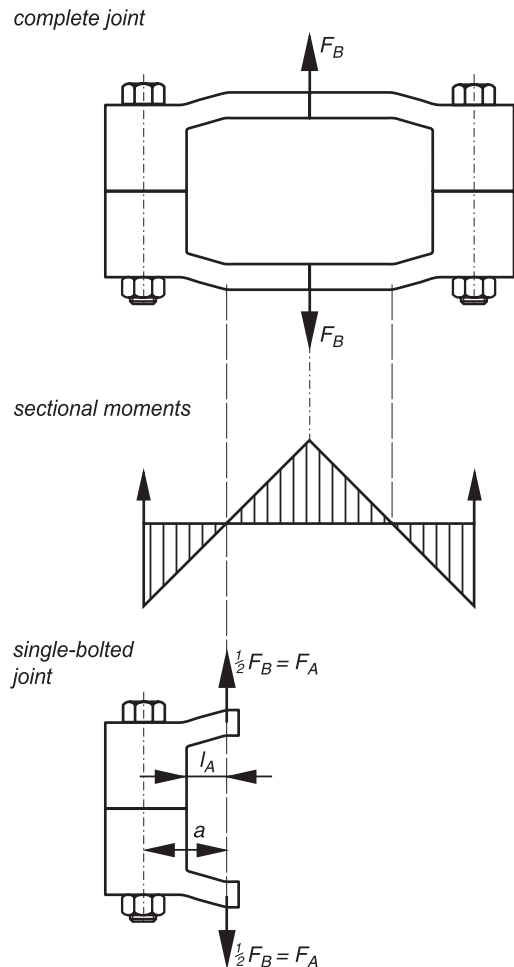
/6. Releasing the single-bolted joint from the complete joint
